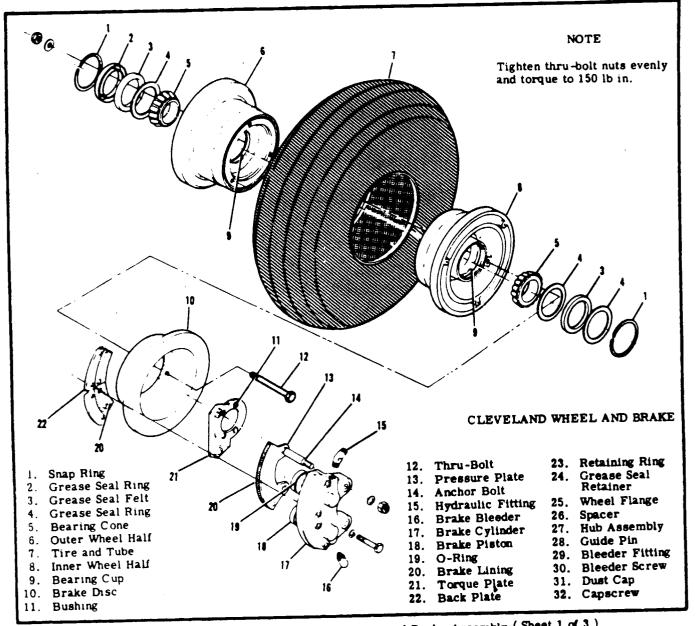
Main Landing Gear Wheel, Tire and Brake Assembly (Sheet 1 of 3)
